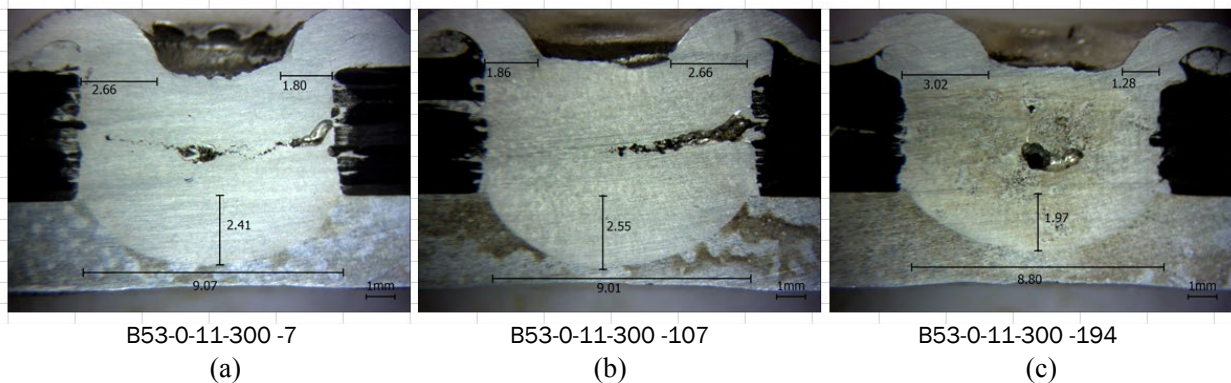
C.4. EL Trial: 1.2 mm 980MPa to 3.0 mm Aural 2 (6 mm pilot) through Dow 5055-C with R4-6GA-V: (a) Weld #7 Section, (b) Weld #107 Section, and (c) Weld #194 Section. Source: Arconic.
